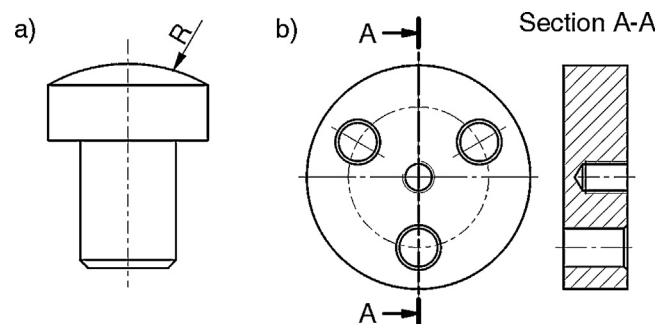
2D drawing: (a) exchangeable clamping/locating element, and (b) its carrier.
